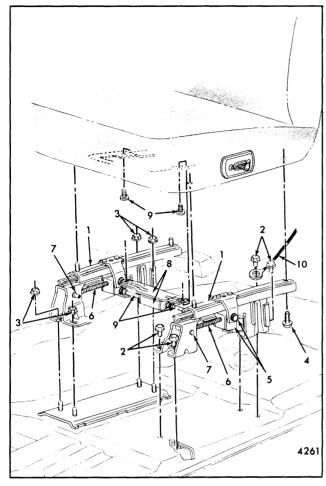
Power Operated Horizontal Adjuster - 60-40, 50-50 and 40-40 Seats
